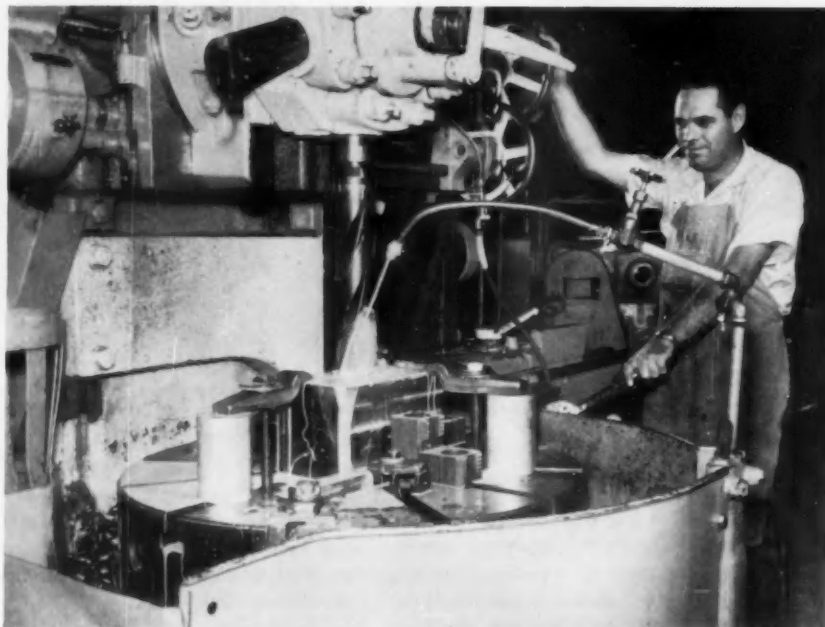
After the 6¼ by 6¼ by 12 in. billet has been sized for tooling purposes on a Cincinnati-Gilbert boring mill using carbide shell end mills, operation No. 2 begins. On this vertical Bullard turret lathe a hole is being bored at the location of the finished bore. A counterbore was first made to a 4.600-4.602 in. diameter to a predetermined depth of tooling purposes. An undercut is then made with a form cutter holding a 0.910 in. width dimension, and a 3.32 in. radius. This provides for material on subsequent operations after heat treatment.
